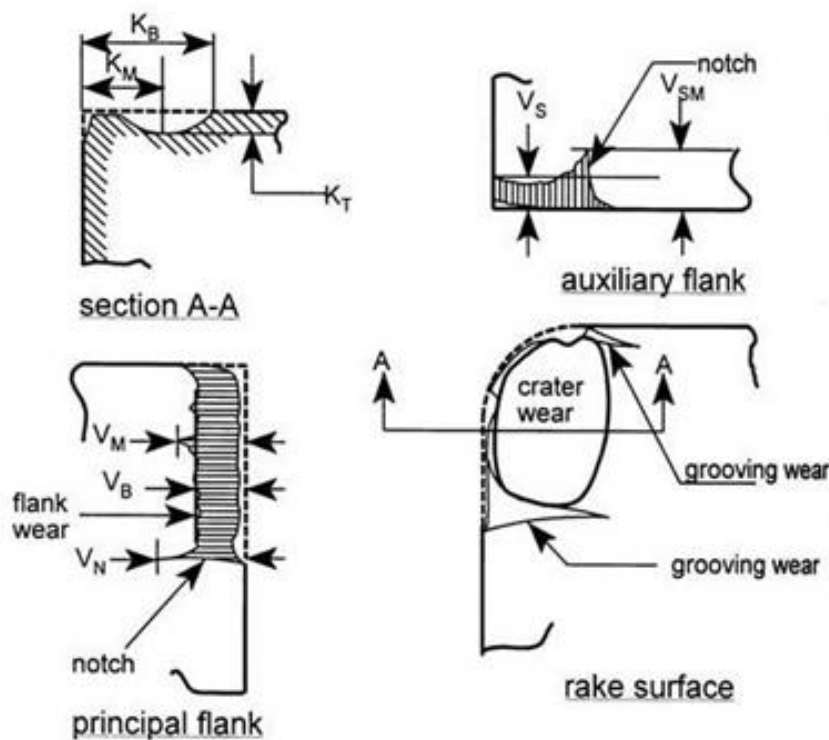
(b) Geometry and major features of wear of turning tools
